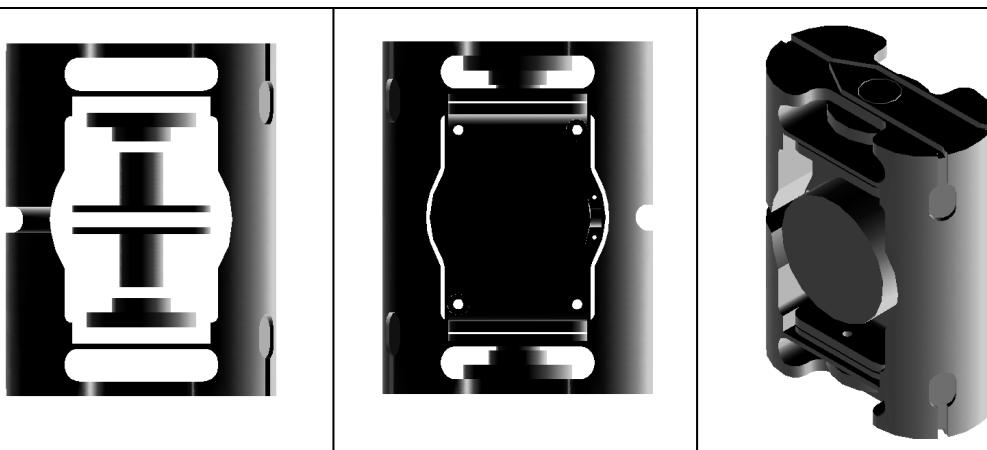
Exploded view (left panel), side view (middle panel), and isometric view (right panel) of the small-weight mounted on the GLM without covers.
